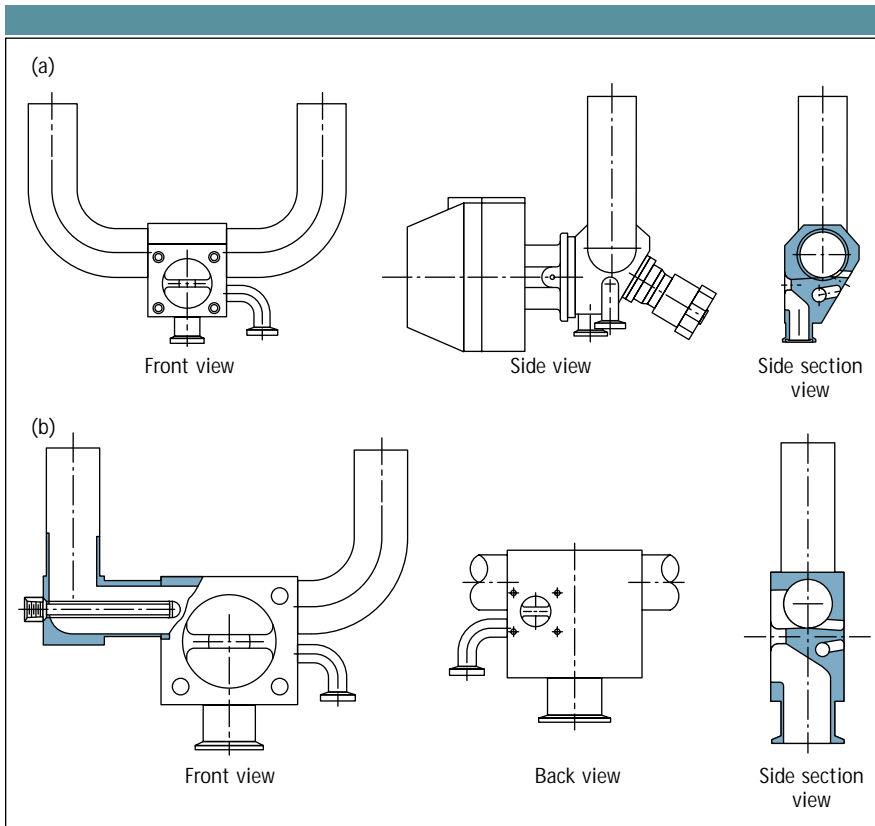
Block bodied tee fabrications: (a) block body tee with integral sample valve; (b) block body tee with integral sample valve and instrument port.
